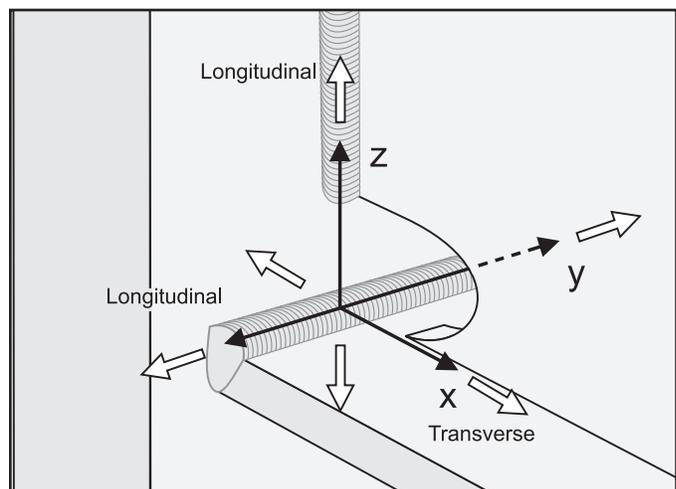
Minimization of triaxial stress at the weld access hole
